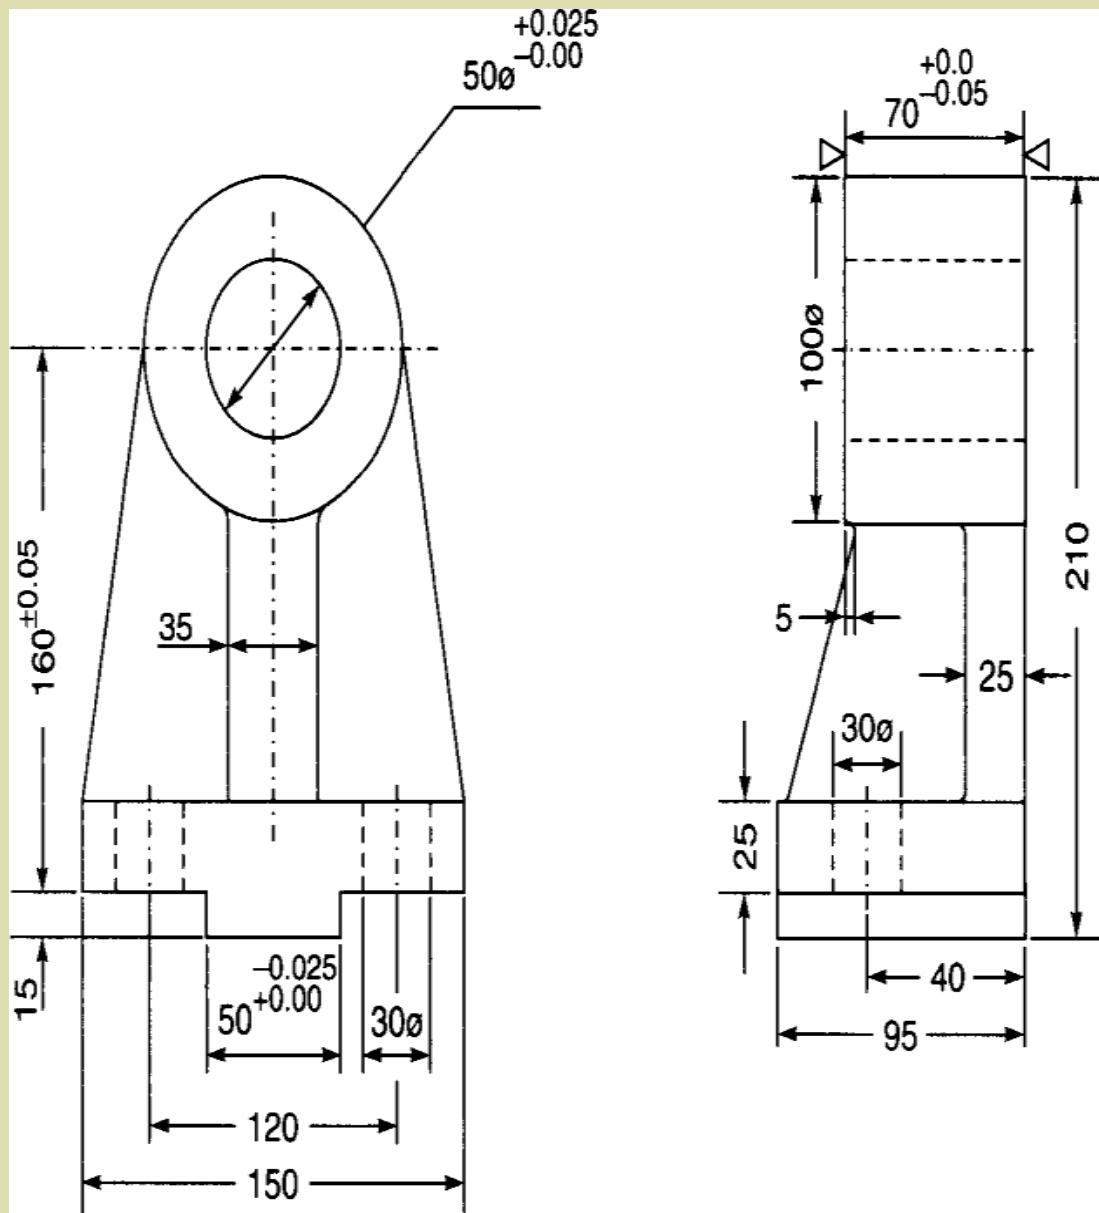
Workpiece for jigs and fixtures design practice
